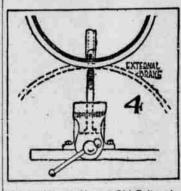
How to Use an Old Bolt and Piece of Pipe as a Rivet Set.
